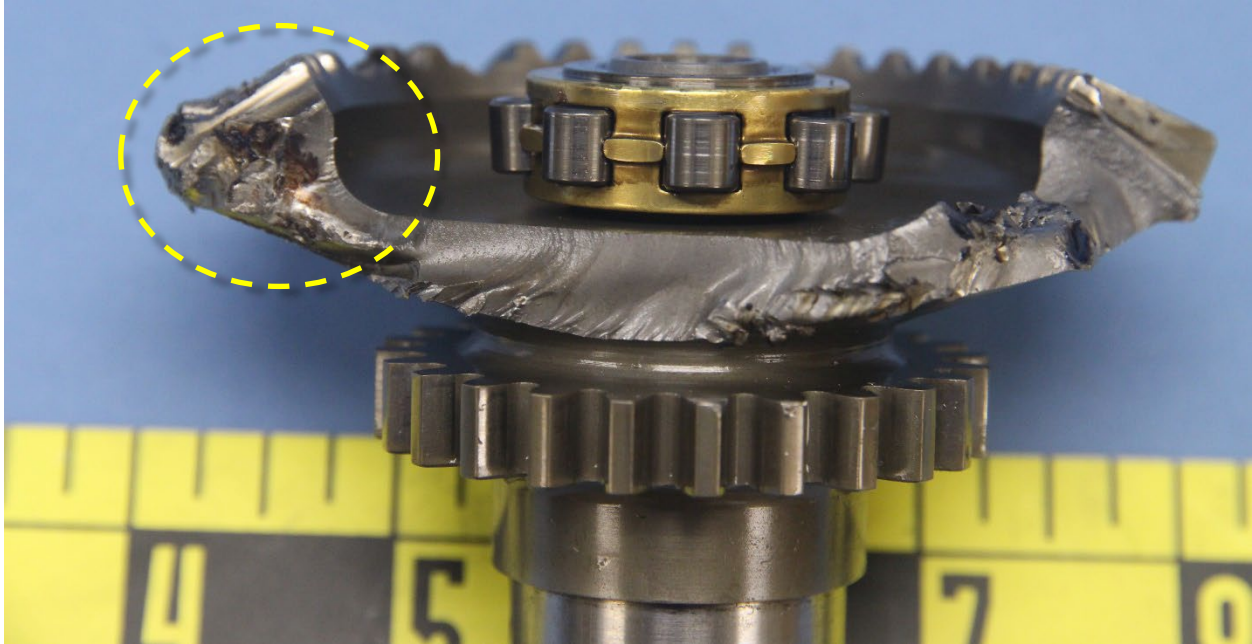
Closer view of the inboard mating main fracture surface of the gear. The circled area is highlighted in Figure 4.
